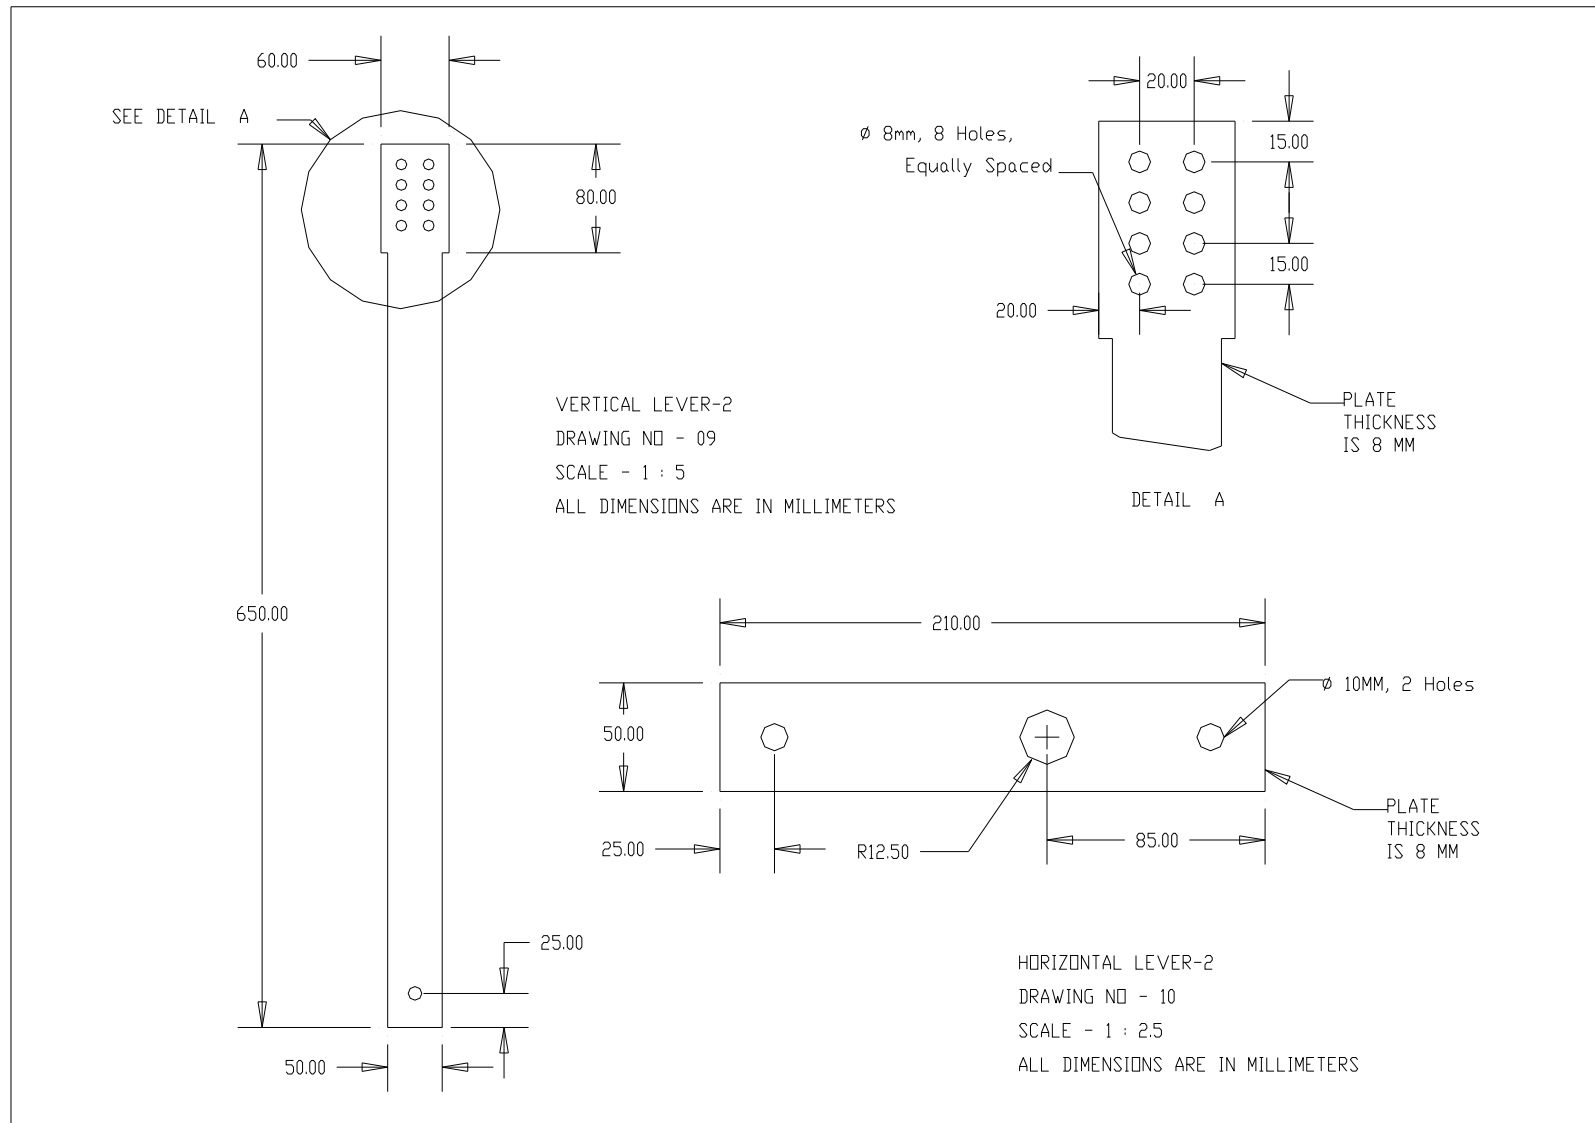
Detailed drawing of vertical lever-2 and horizontal lever -2
